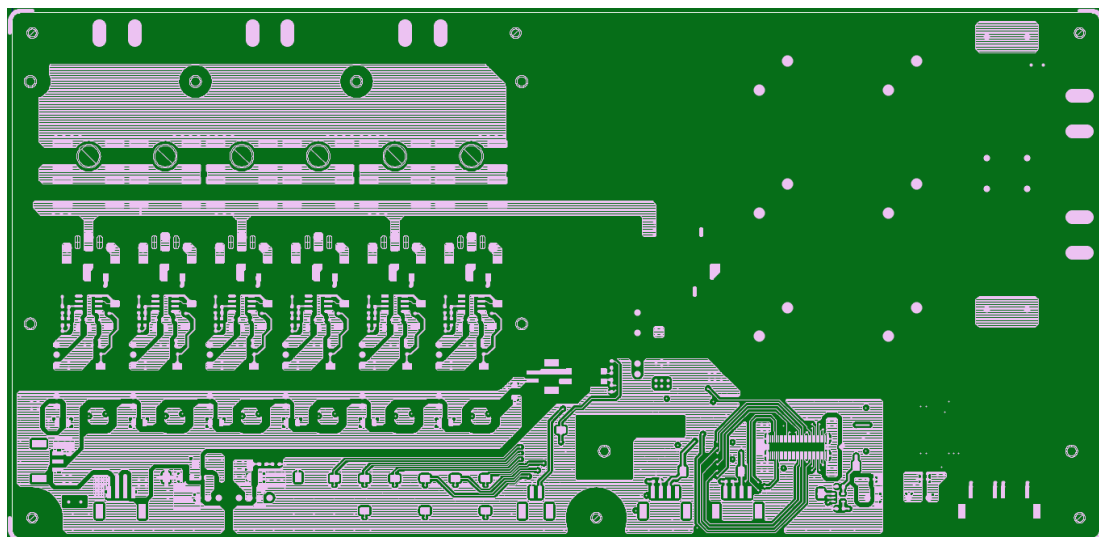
shows PCB pattern diagram of the main circuit board, Fig. 3.2 shows PCB pattern diagram of the control board.
